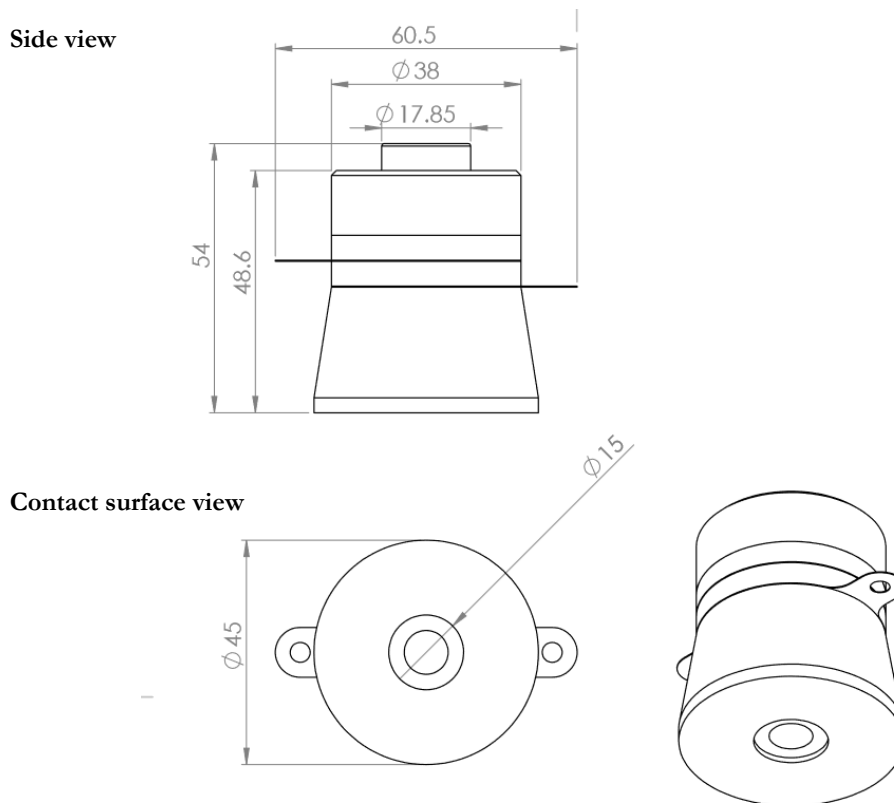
Technical drawing of 40 kHz HPUT selected for investigation
